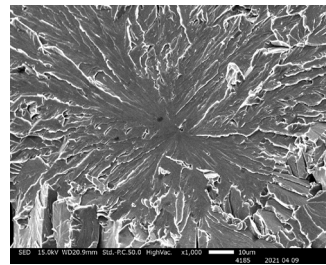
An example of fracture surface at trigger point of brittle fracture
